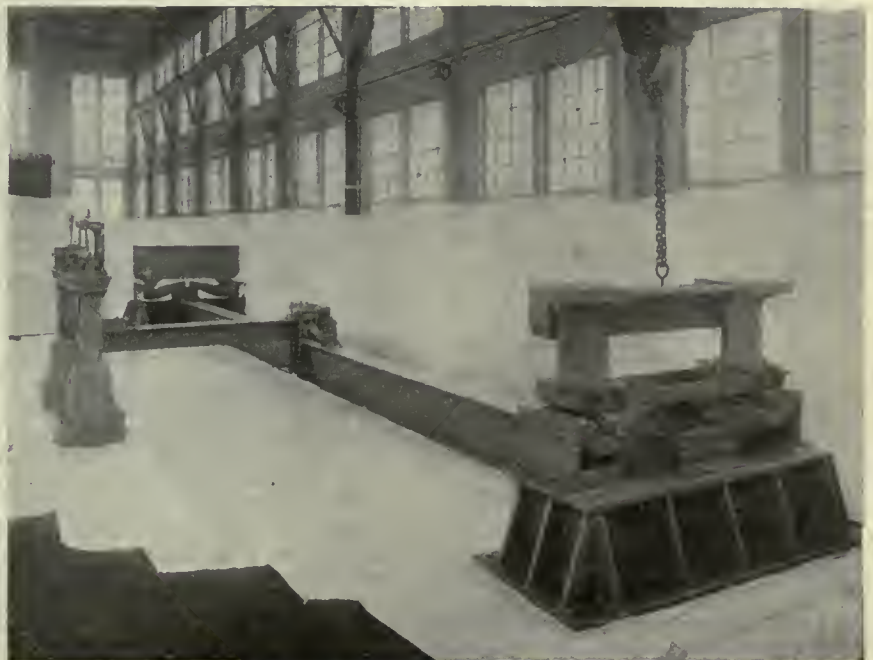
THE SCALE ASSEMBLED BEFORE OPERATION
